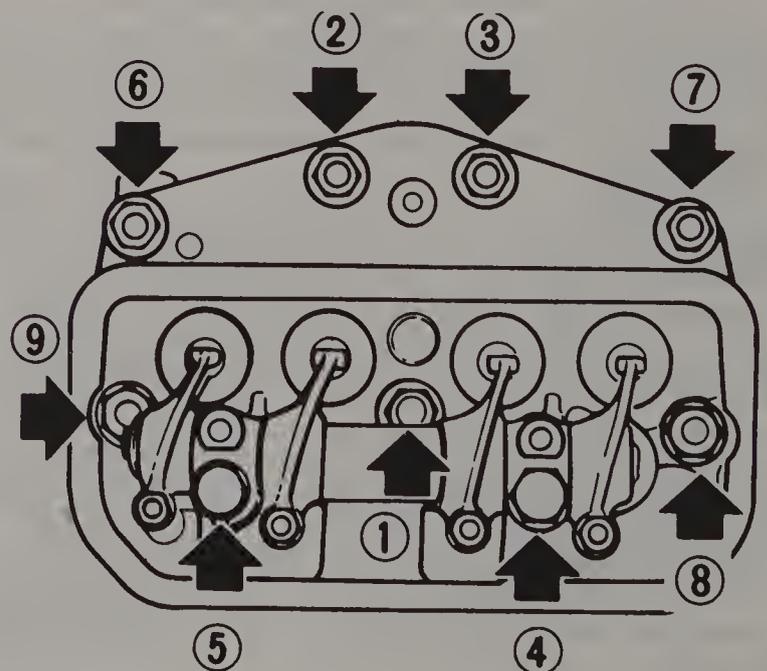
Tightening sequence for cylinder head nuts and bolts (Sec 47)
